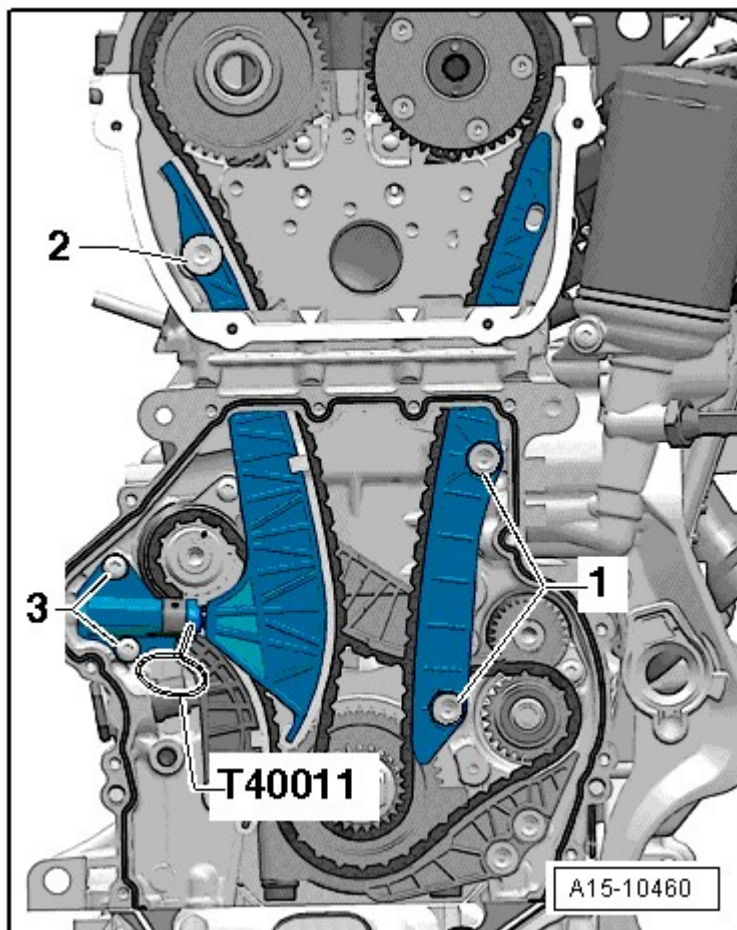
Identifying Camshaft Timing Chain Tensioner Bolts, Camshaft Timing Chain Guide Rail And Guide Pins
